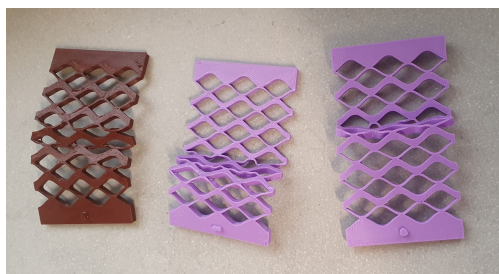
Flat sample printed with disconnections due to a mismatch in the minimum printer layer thickness and geometrical thickness.
